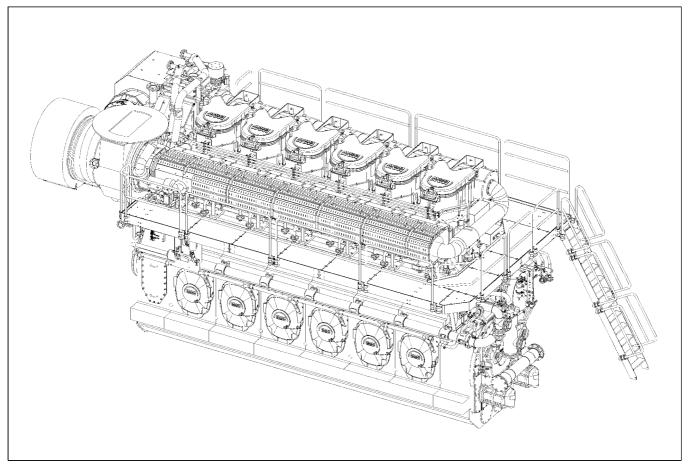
Engine 6L 58/64 CD, viewed from the exhaust side
